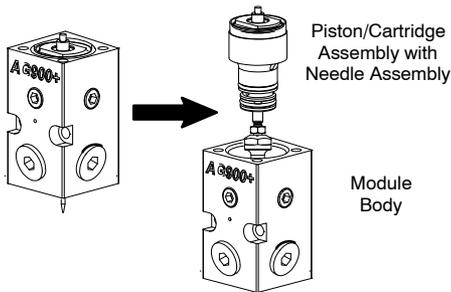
Removing Piston/Cartridge and Needle Assembly from Module Body
